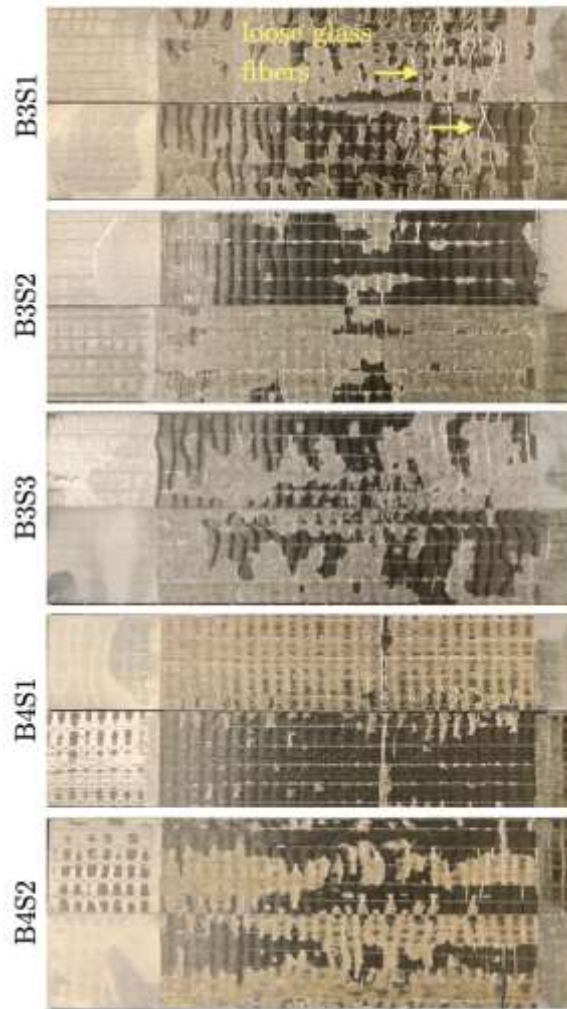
DCB UV laser post-testing visual inspection of the fractured surfaces. Crack propagation occurring from left to right.
